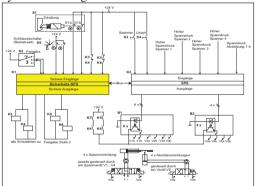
Circuit diagram for safe workpiece clamping on the machining center
